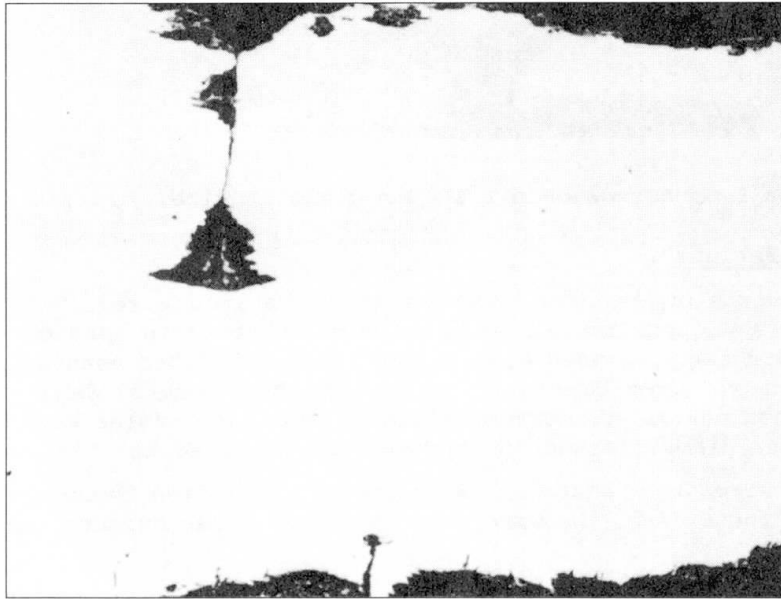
Corrosion fatigue crack adjacent to final fracture.
